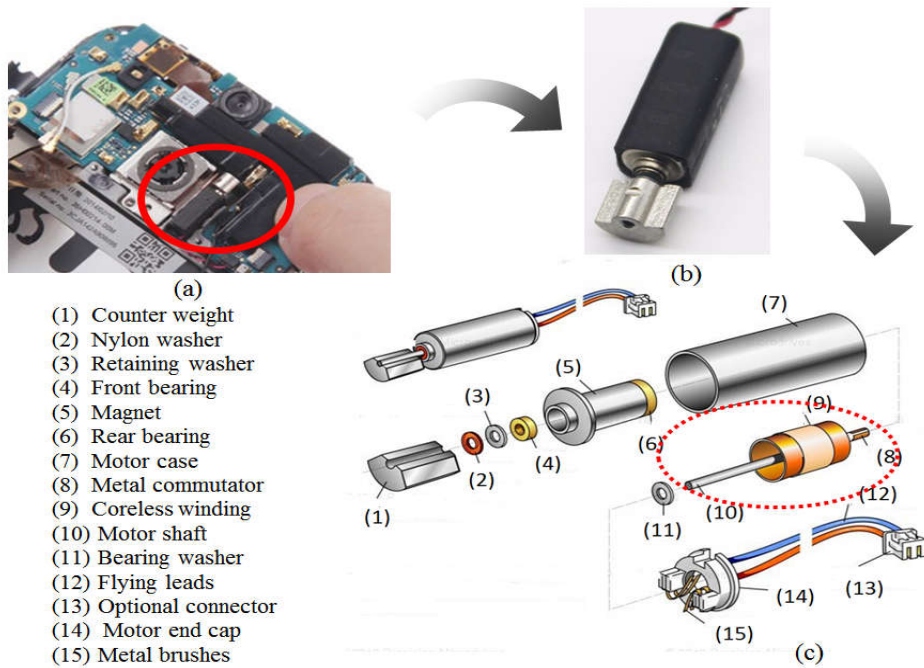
3: A miniaturized vibrating motor: a) Mobile phone, b) Vibrating mobile-phone motor, c) Miniatured motor [13].
